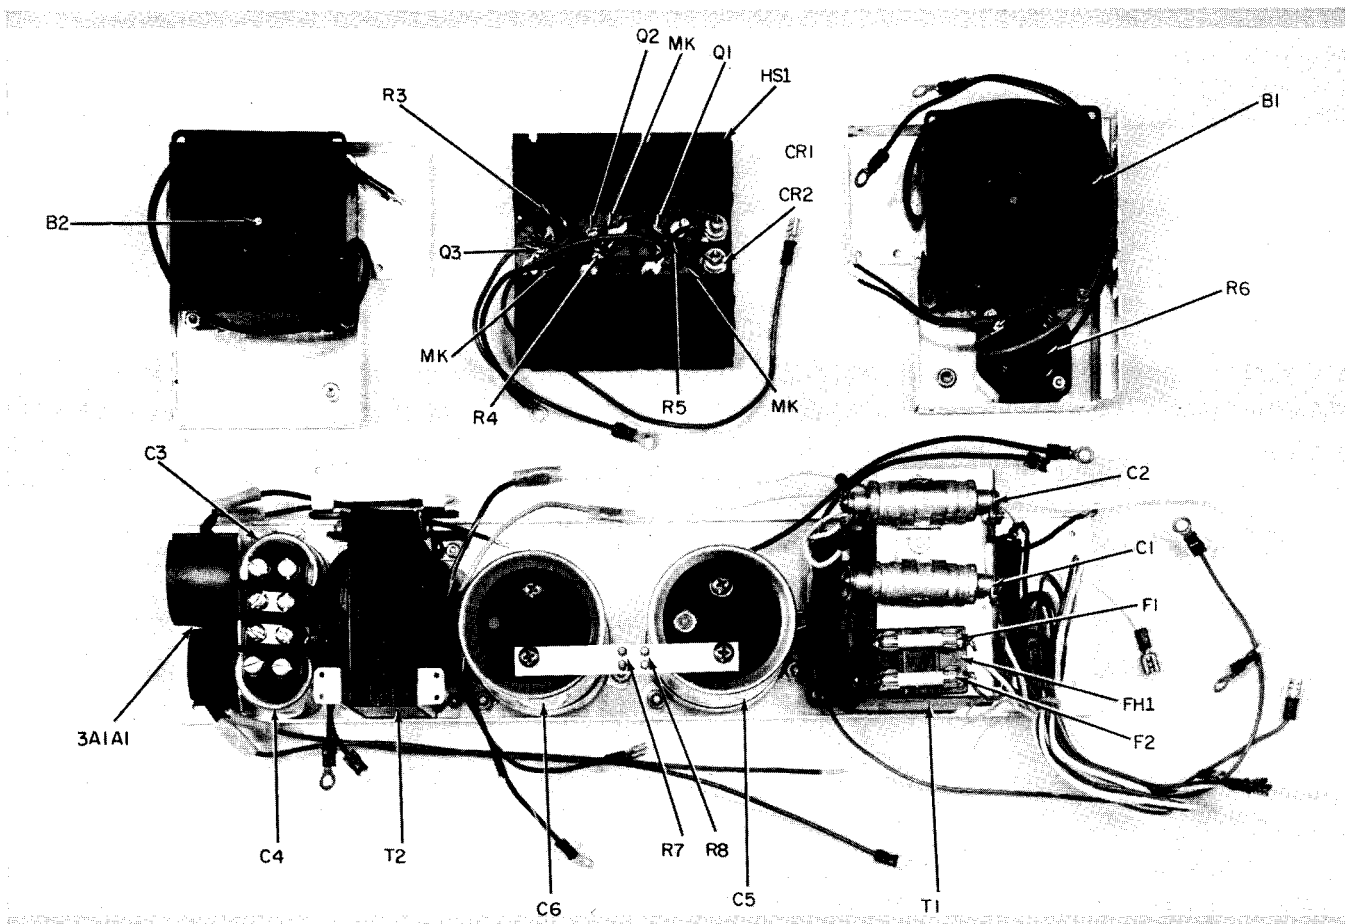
POWER SUPPLY CHASSIS ASSEMBLY
